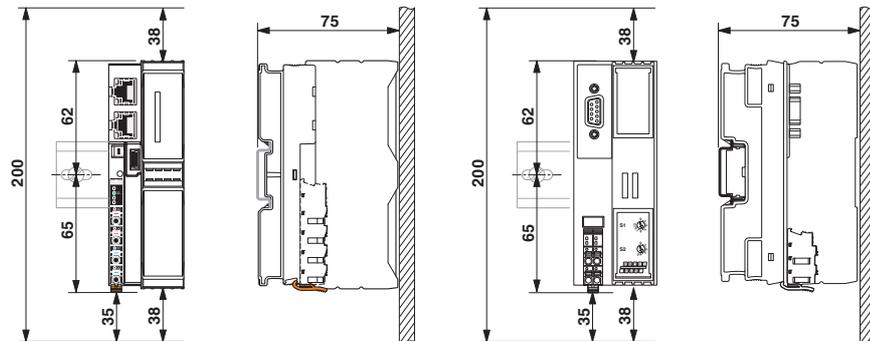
Mounting distances: bus coupler (dimensions rounded)
